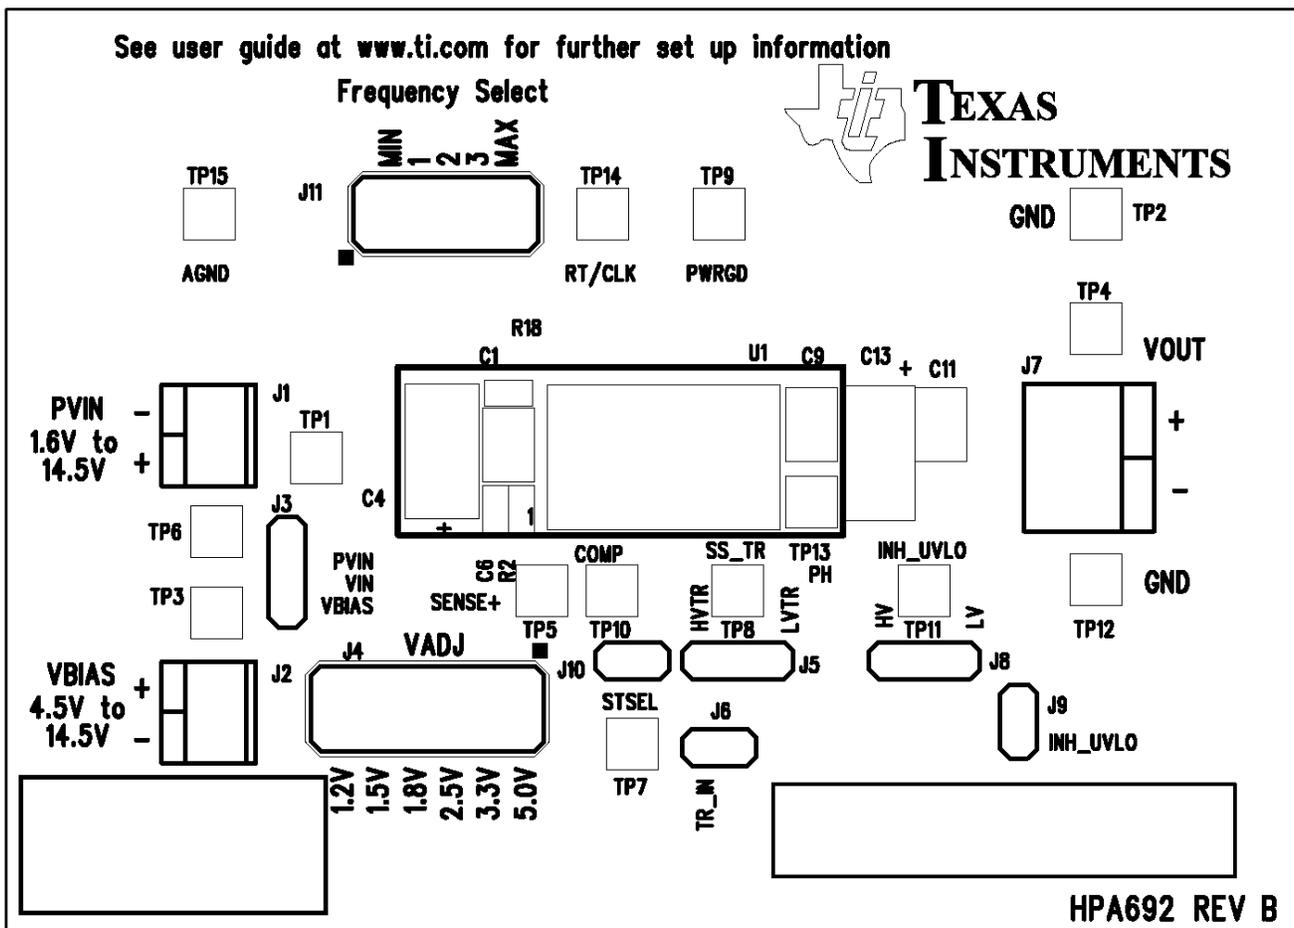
LMZ3150xEVM-692 Top-Side Layer and Assembly
